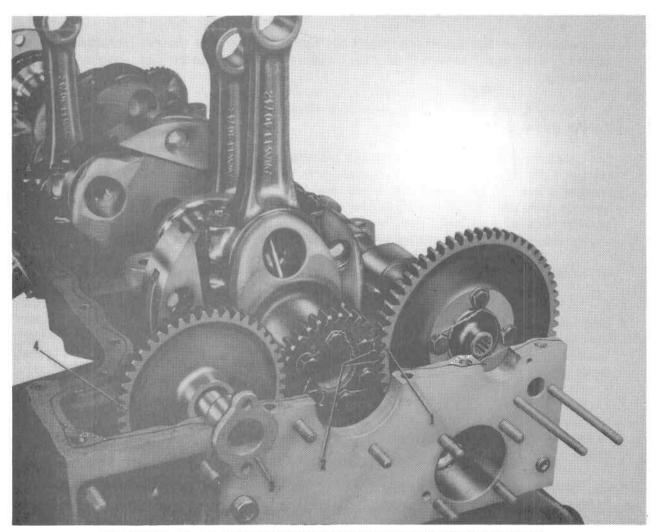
IDLER GEAR, SUPPORT PIN AND TIMING MARKS.
